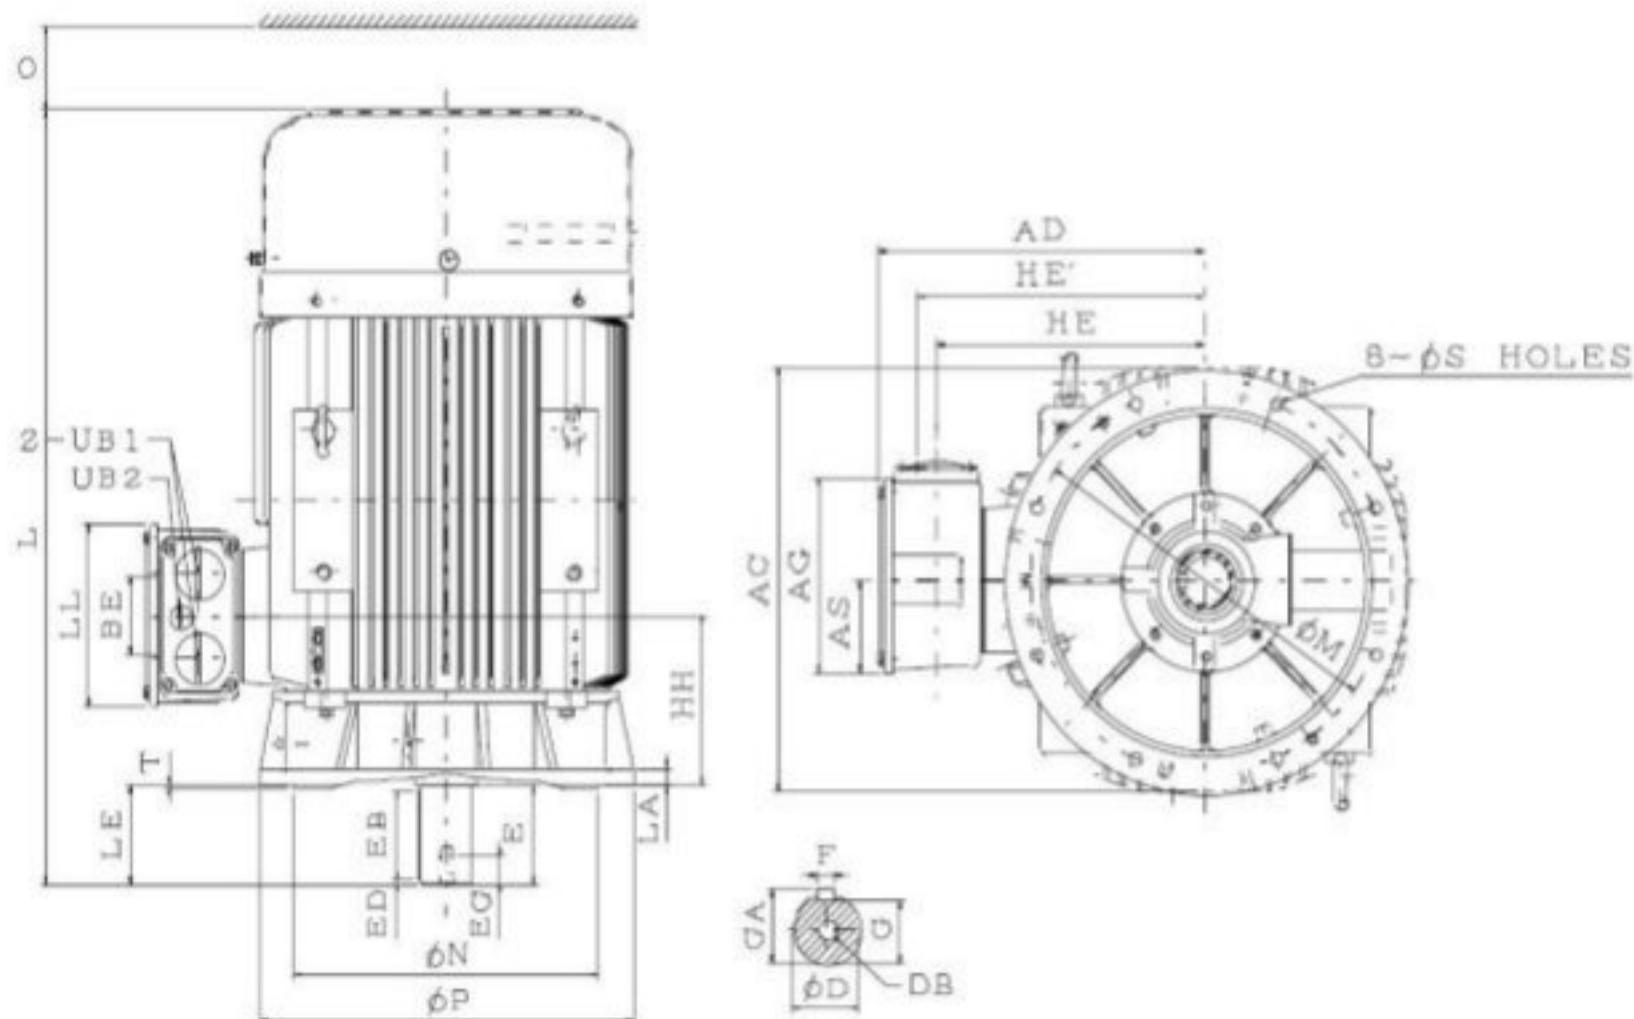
Outline drawing of cast iron design, mounting V1; frame size 280
